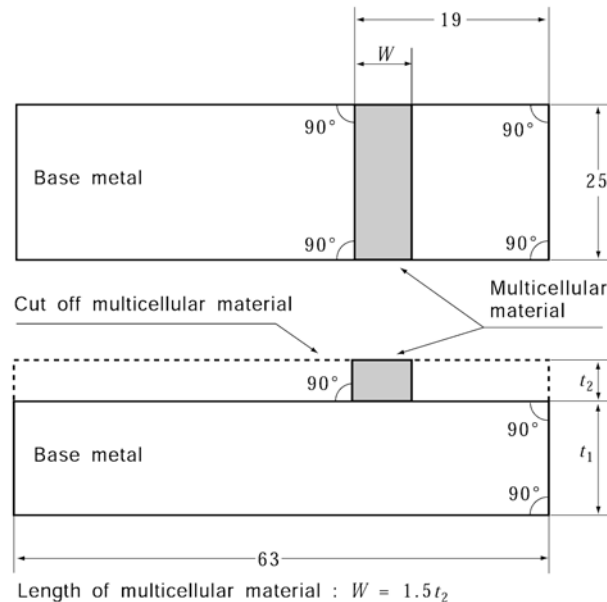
Size and Dimensions of Shearing Test Specimens (unit: mm)
